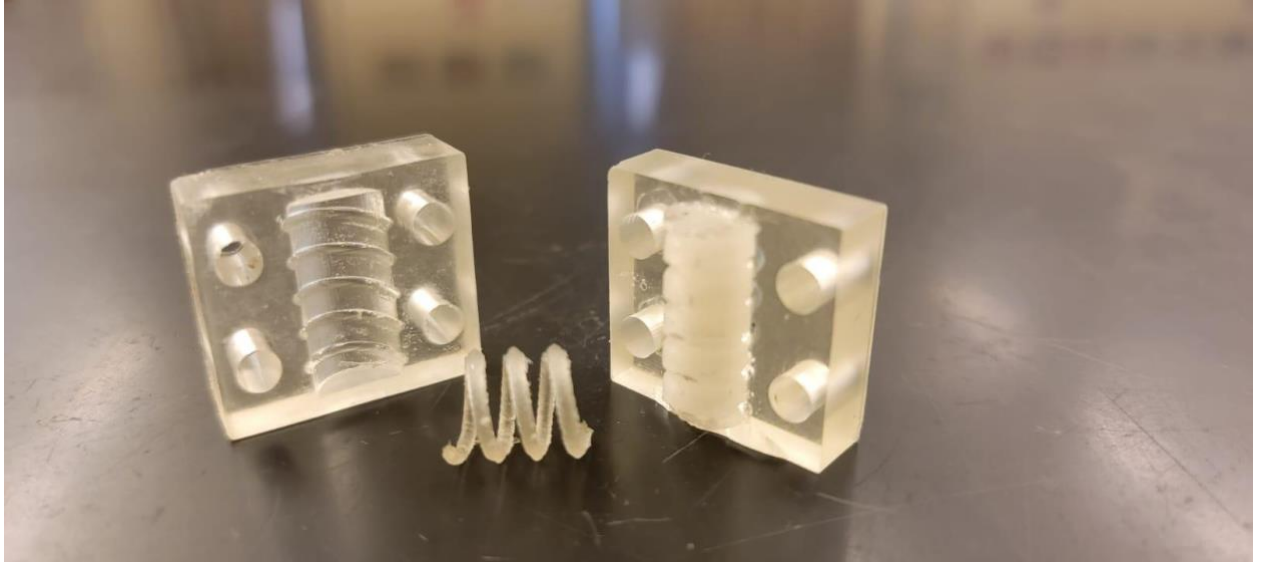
Fully cured spring after UV curing alongside the disassembled mold
